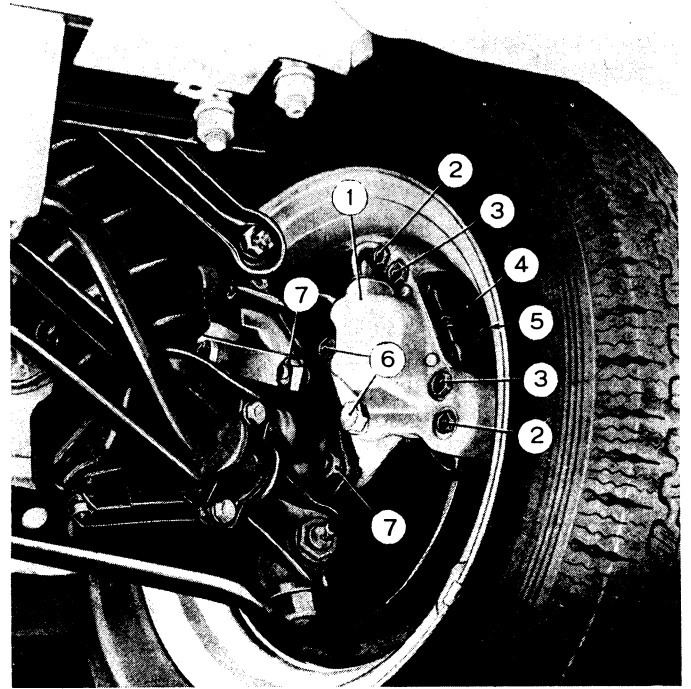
Left front wheel brake caliper - 1500 Cabriolet.
